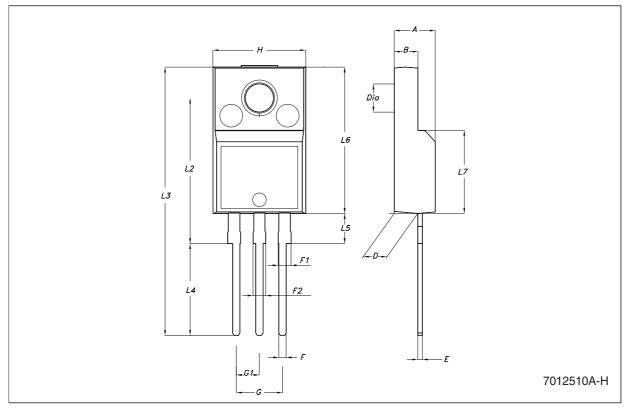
Drawing dimension tube for TO-220 Dual Gauge (mm)
